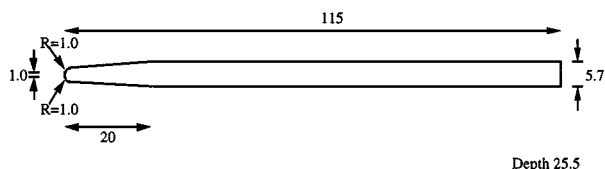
Forming wedge used for Imperial College specimens. (All dimensions in millimetres.)
